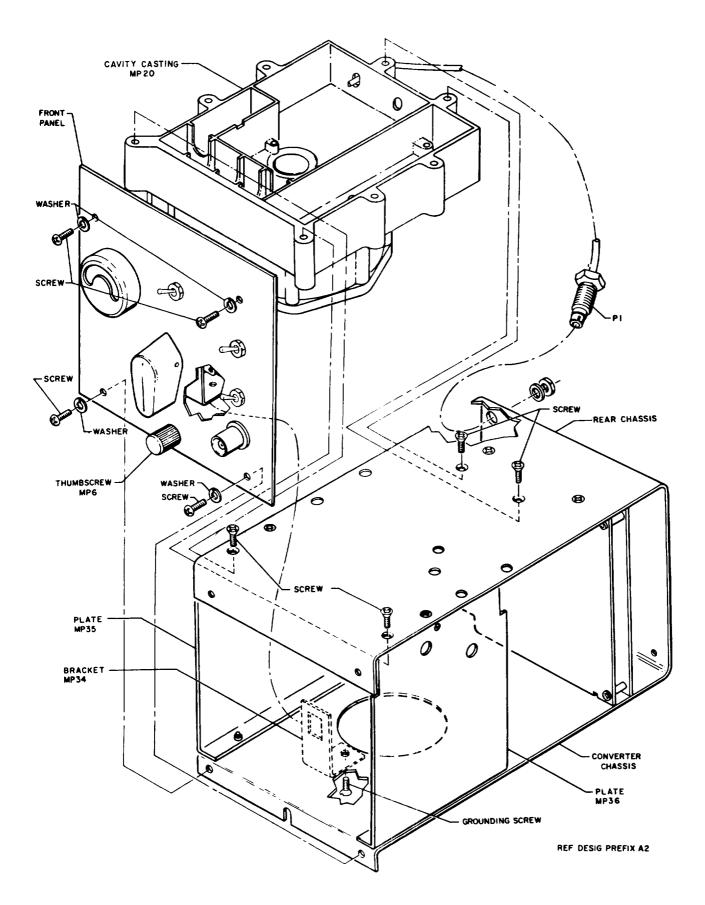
Electronic Frequency Converter A2 Exploded View, Front and Rear Chassis Separated
